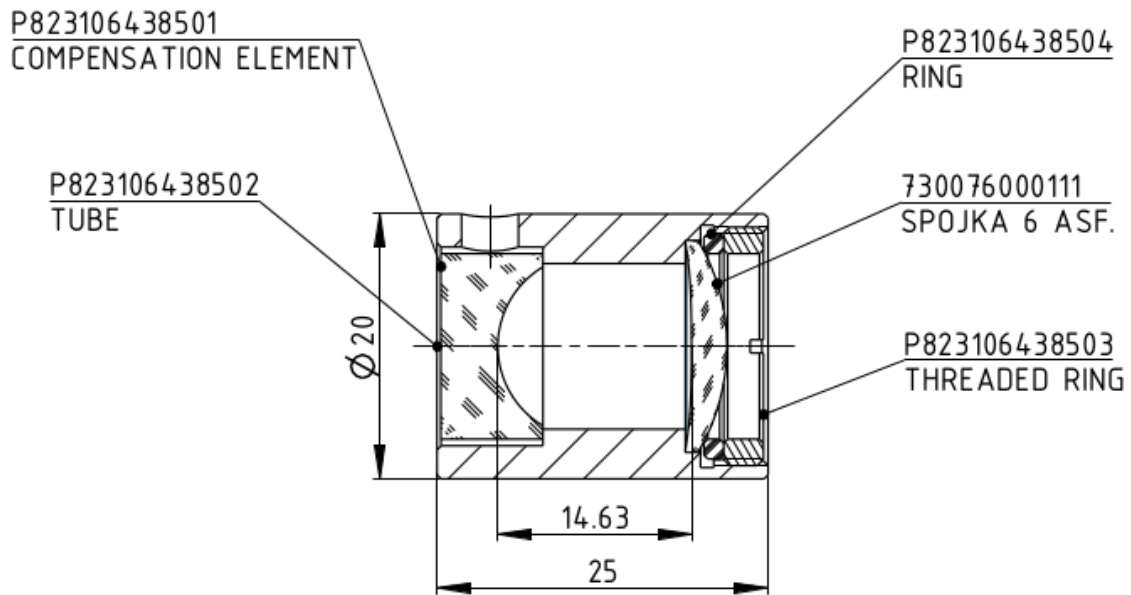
Mechanical device for null measurement, complete drawing is in Appendix D
